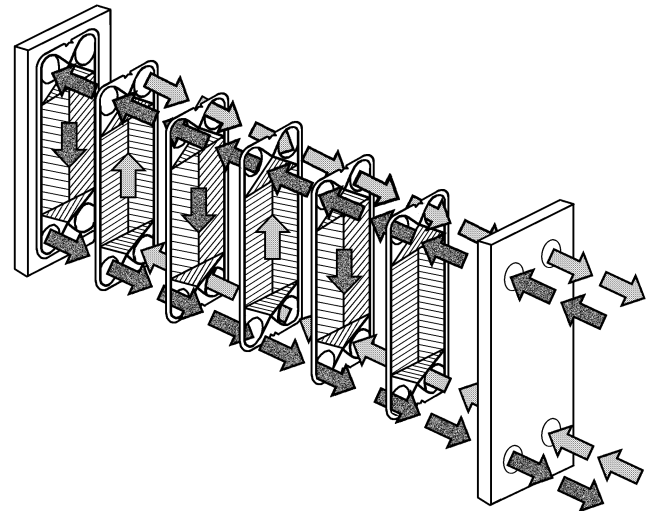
Flow Path of Welded Plate Heat Exchanger
